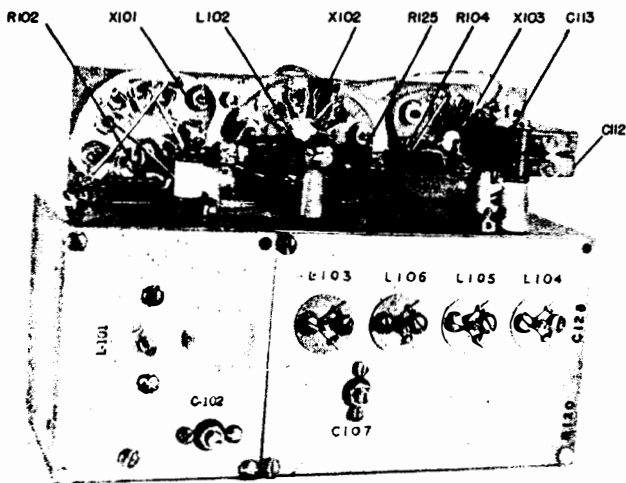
Transmitter Exciter Assembly, Bottom View
